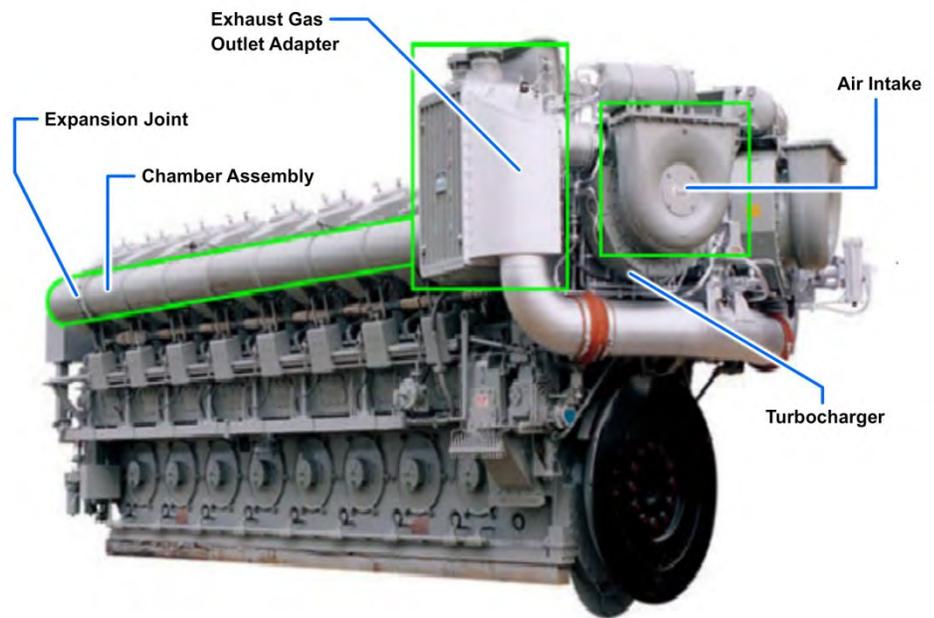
Exhaust manifold of a turbocharged engine.
